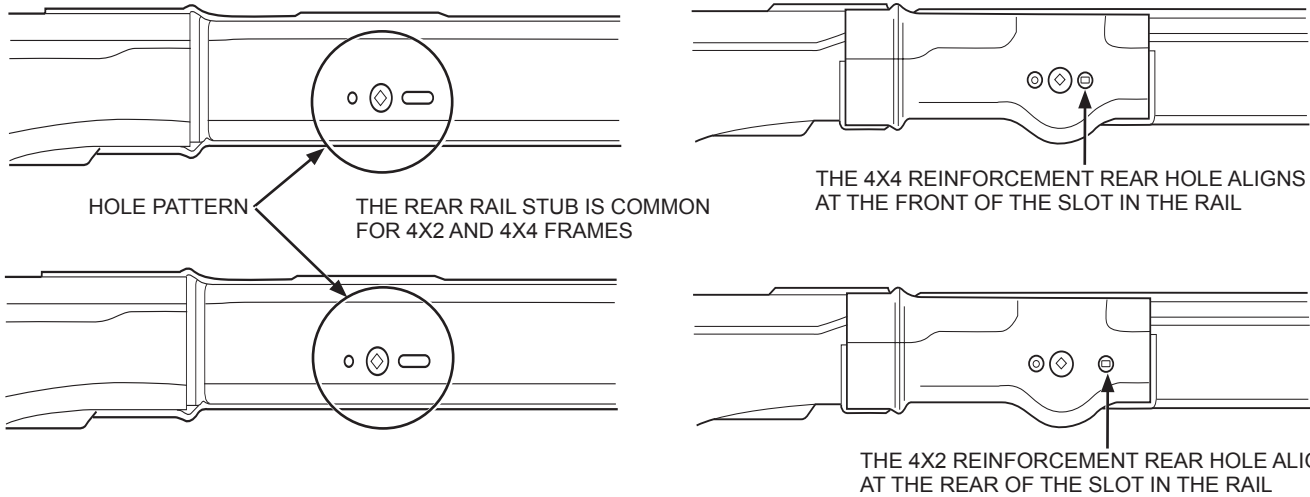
BOTTOM VIEW OF FRAME AT REAR JOUNCE DOUBLER SHOWING 4X2 AND 4X4 HOLE PATTERN MATCH-UP BETWEEN FRAME RAIL SECTION AND JOUNCE DOUBLER
